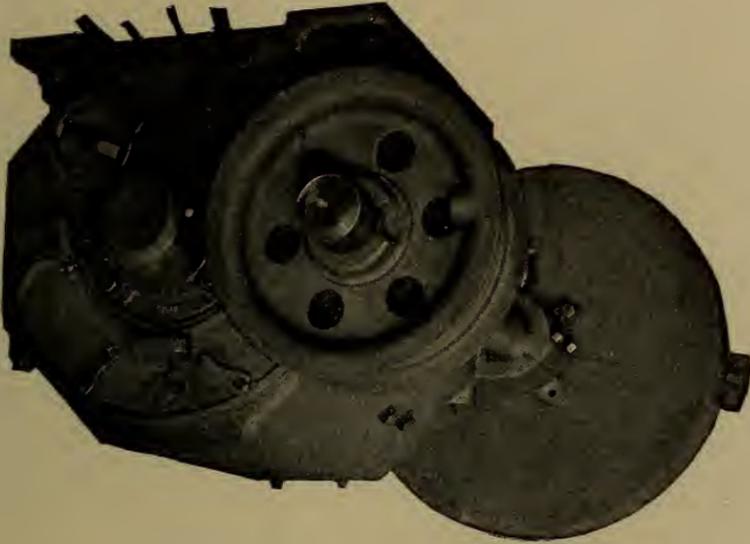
CB-25 M. 8, 30 H. P., 310 R. P. M., 125-Volt Ammunition-Hoist Motor with ED, 108 Disc Brake. Gen. Elec. Co.
